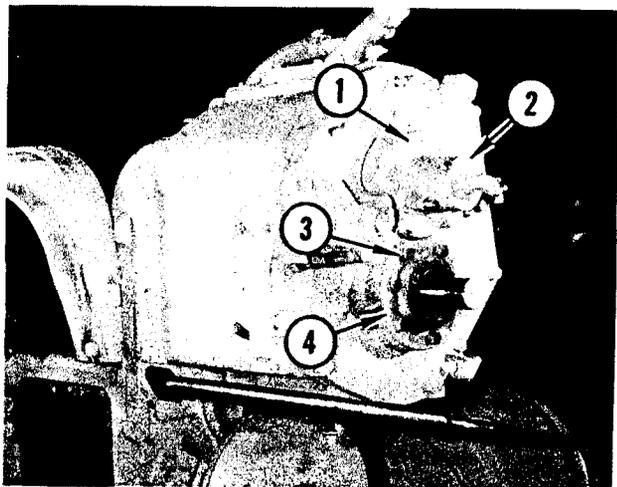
OIL CAP & BEARING COVER REMOVAL
